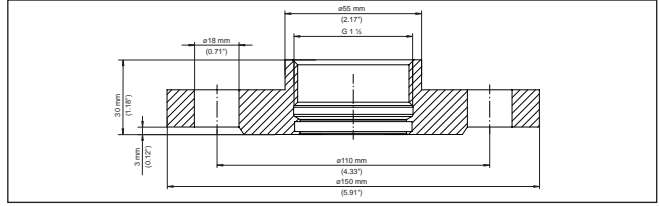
Dimensions of threaded adapter G1½ (DIN 3852-X) on flange DN 40 (EN 1092-1, Form B1) PN 40
